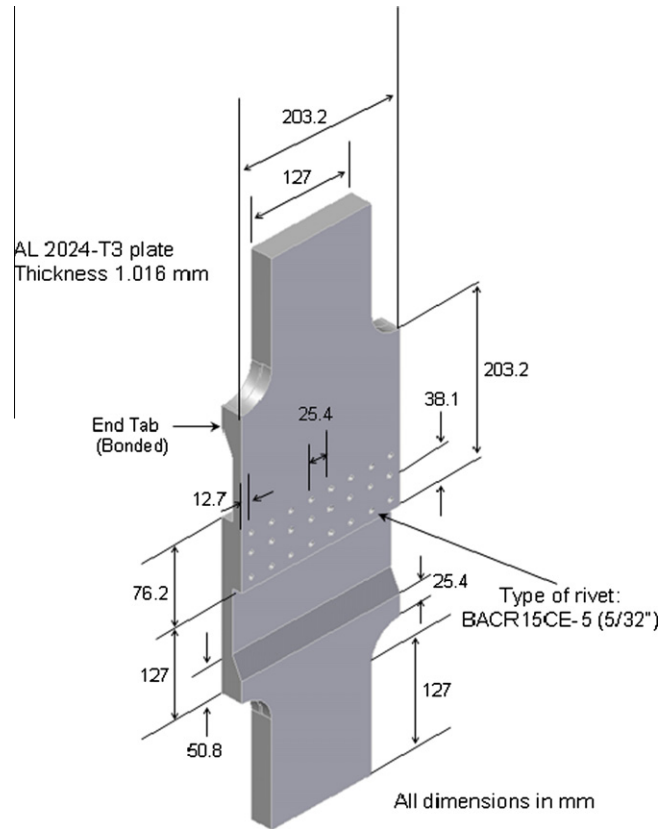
Schematic of a fuselage lap joint specimen, all dimensions in mm.
